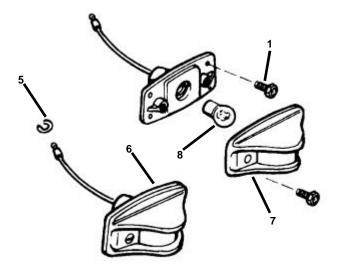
CLEARANCE LIGHT ASSEMBLY.
